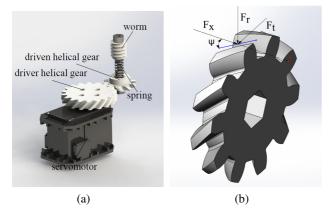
(a) 3D CAD model of the breakaway clutch mechanism; (b) a perspective view of the driven helical gear geometry and forces.
